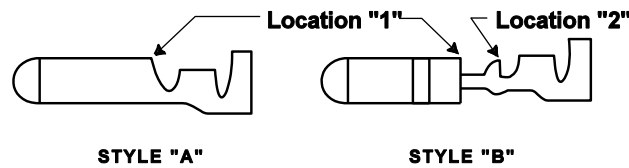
TERMINAL DESIGN STYLE
